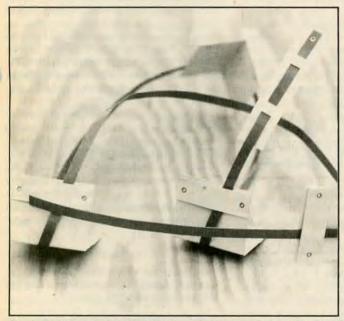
The complete Wrap Strap shows construction details of corner clamps and the rivets holding the strap guides. The cinch buckle is riveted to one end of the long strap.
